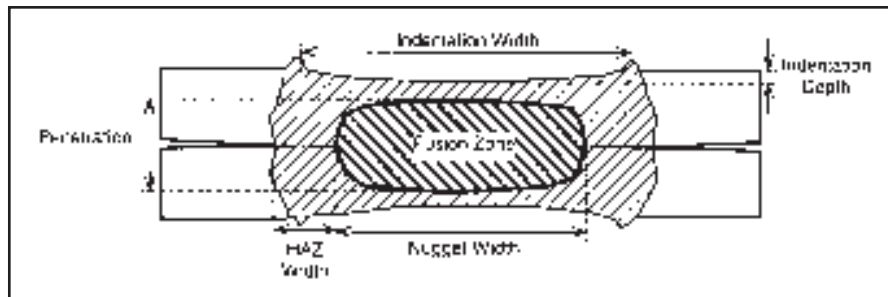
A weld's geometric attributes, as shown in a schematic cross section of a spot weldment (Ref. 1).
